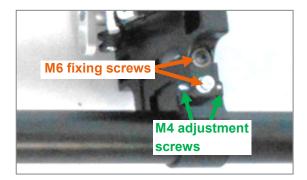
M6 fixing screws and M4 adjustment screws to adjust the angle of the locking plate
